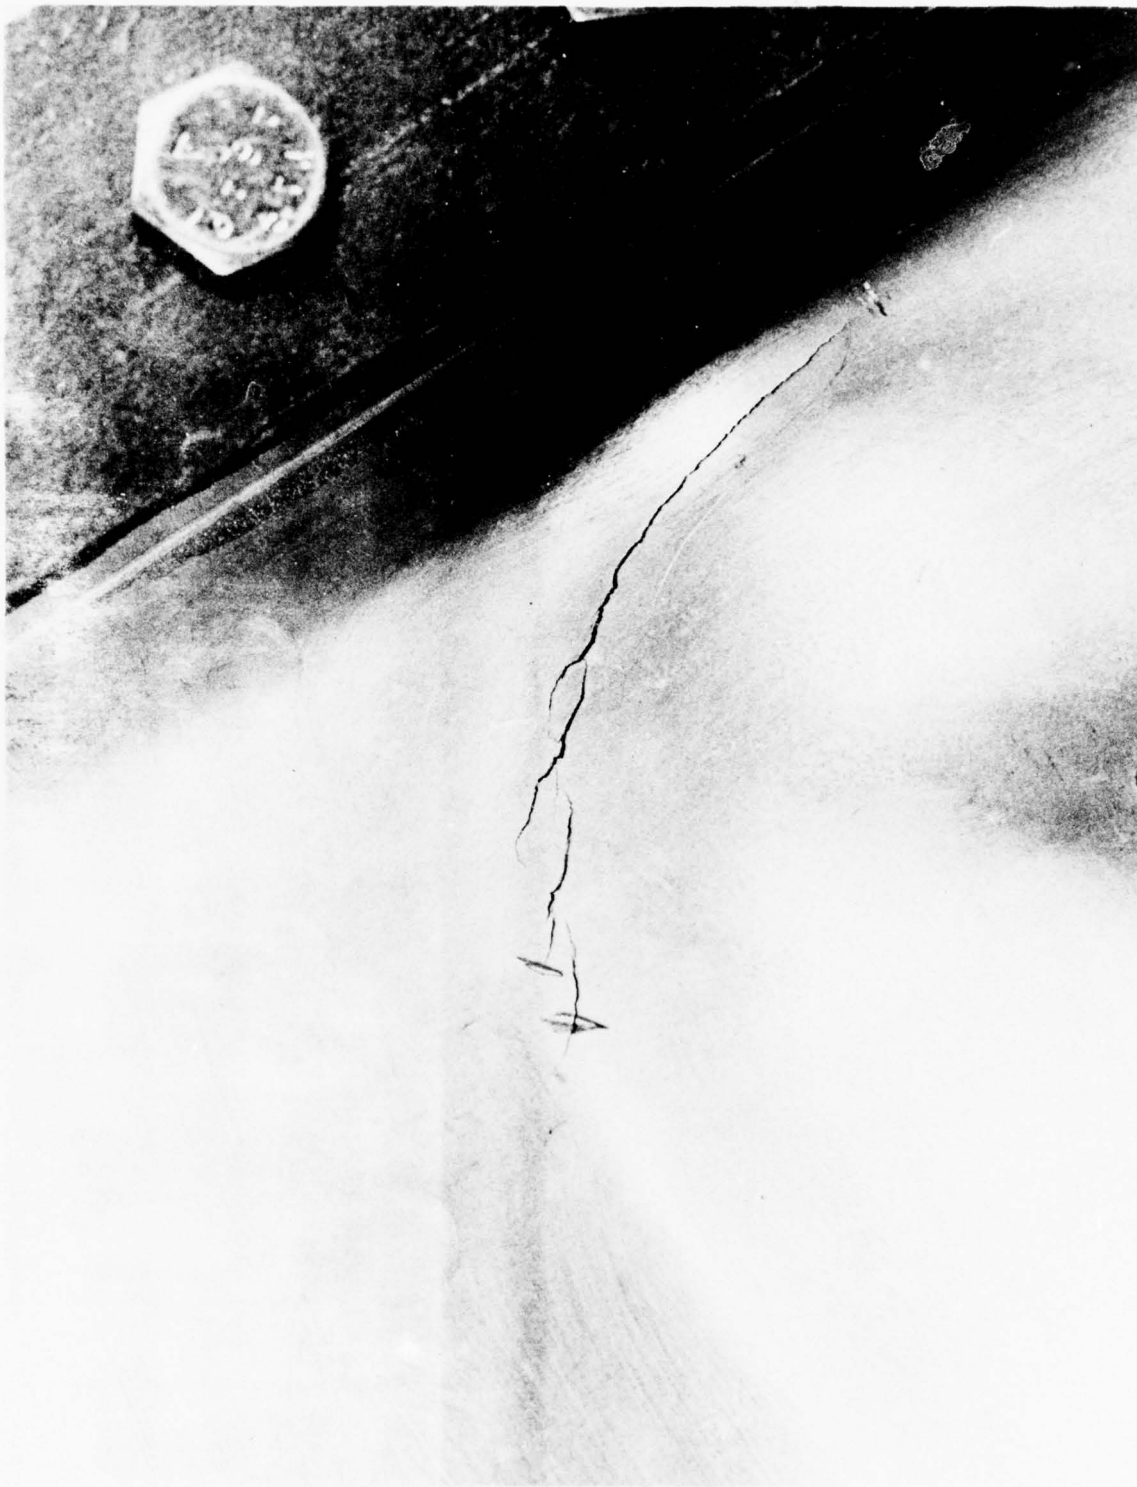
WELDBONDED PANEL FATIGUE CRACK AT
